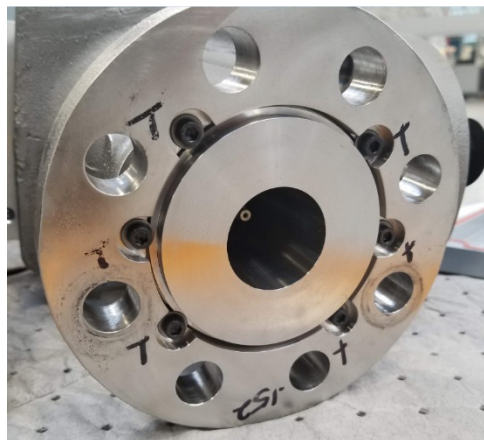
Illustration of Raised Face Style Diverging Sleeve
